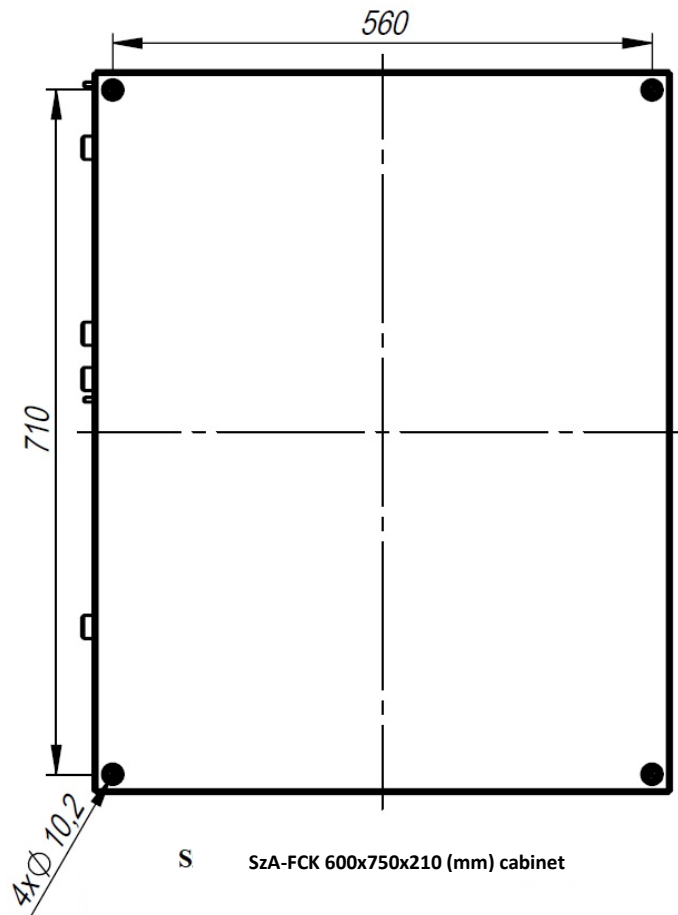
Mounting hole dimensions in SzA-FCK 600x750x210.
